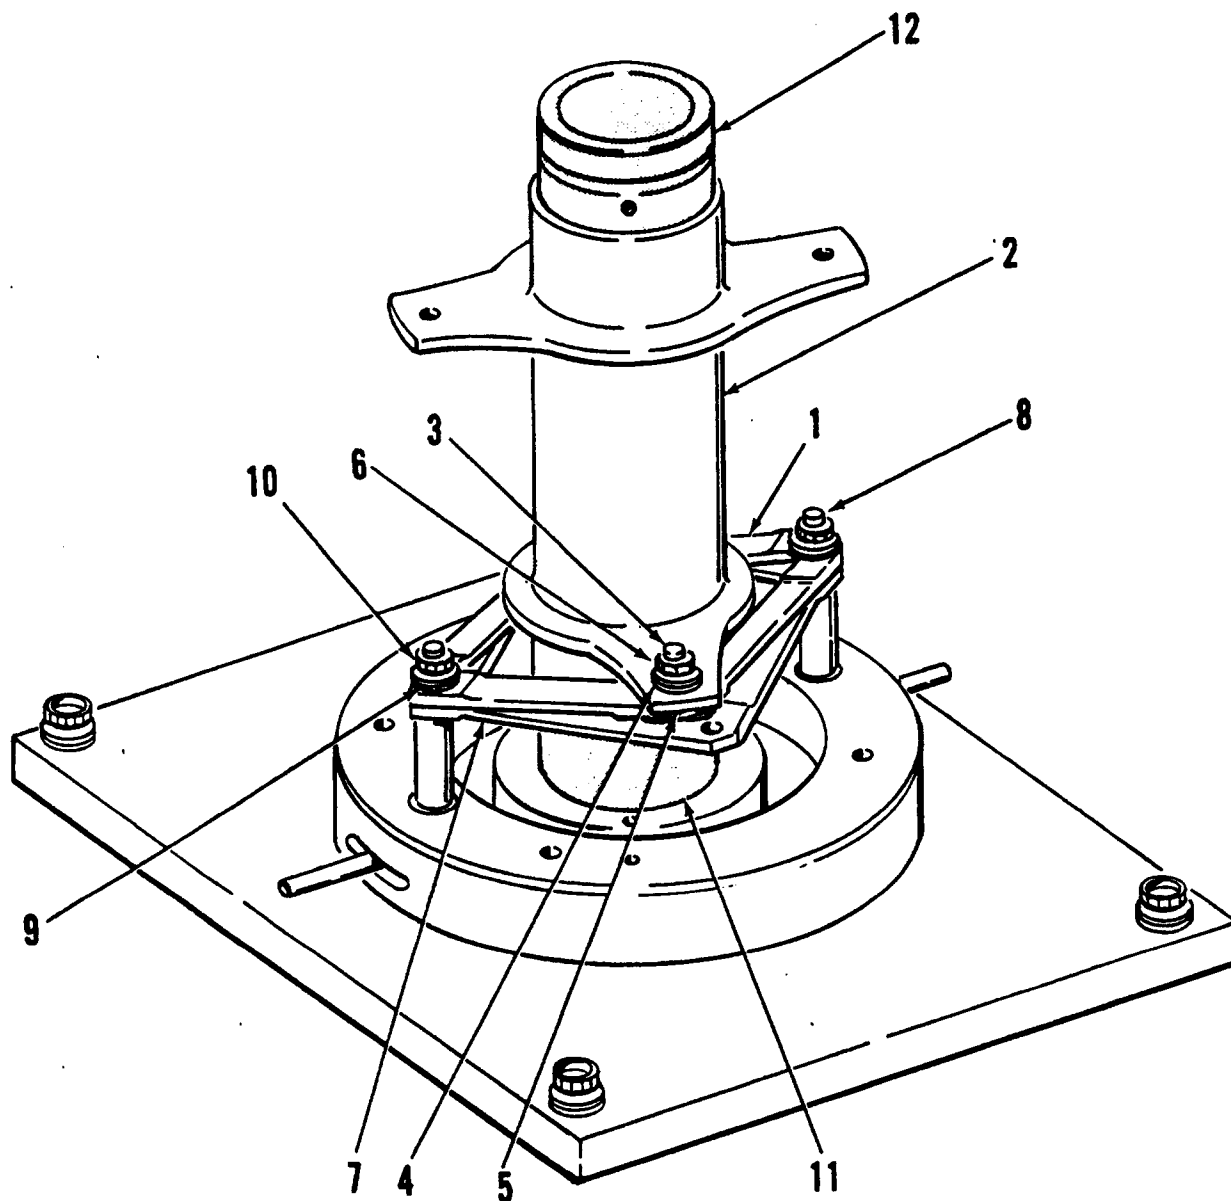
Drive Shaft on Assembly/Disassembly Fixture
